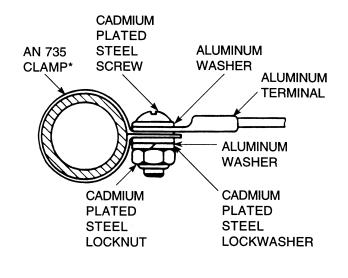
Aluminum Jumper Connector to Tubular Structure
